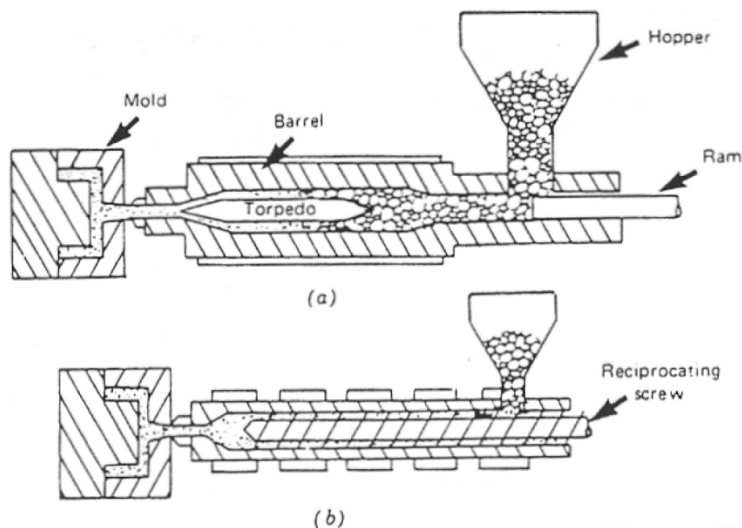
(a) ram-fed (b) screw fed injection molding machine (Billmeyer, 1984)
